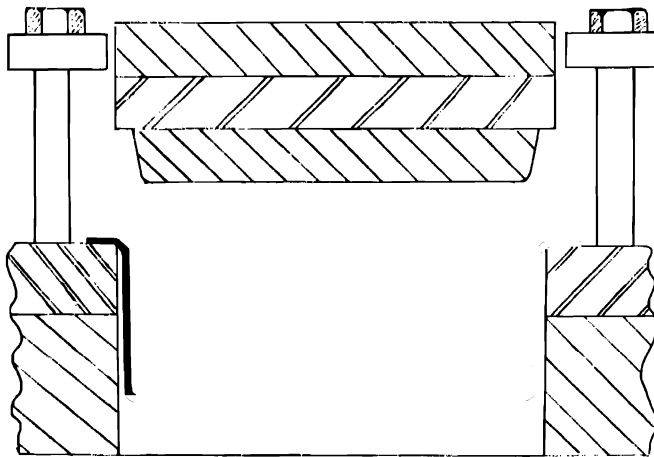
Final trimming tool ("blanking type") for producing rectangular box.
